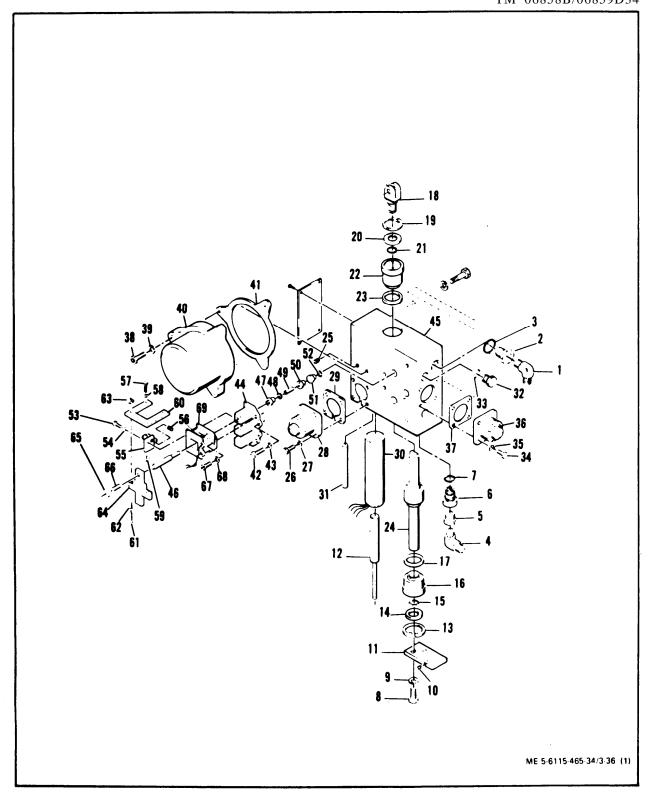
Hydraulic Actuator Unit, Exploded View (Sheet 1 of 2)
